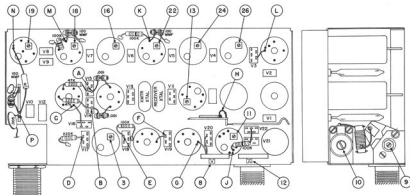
Bottom and Side Views of Chassis Showing Location of Alignment Adjustments and Test Points
